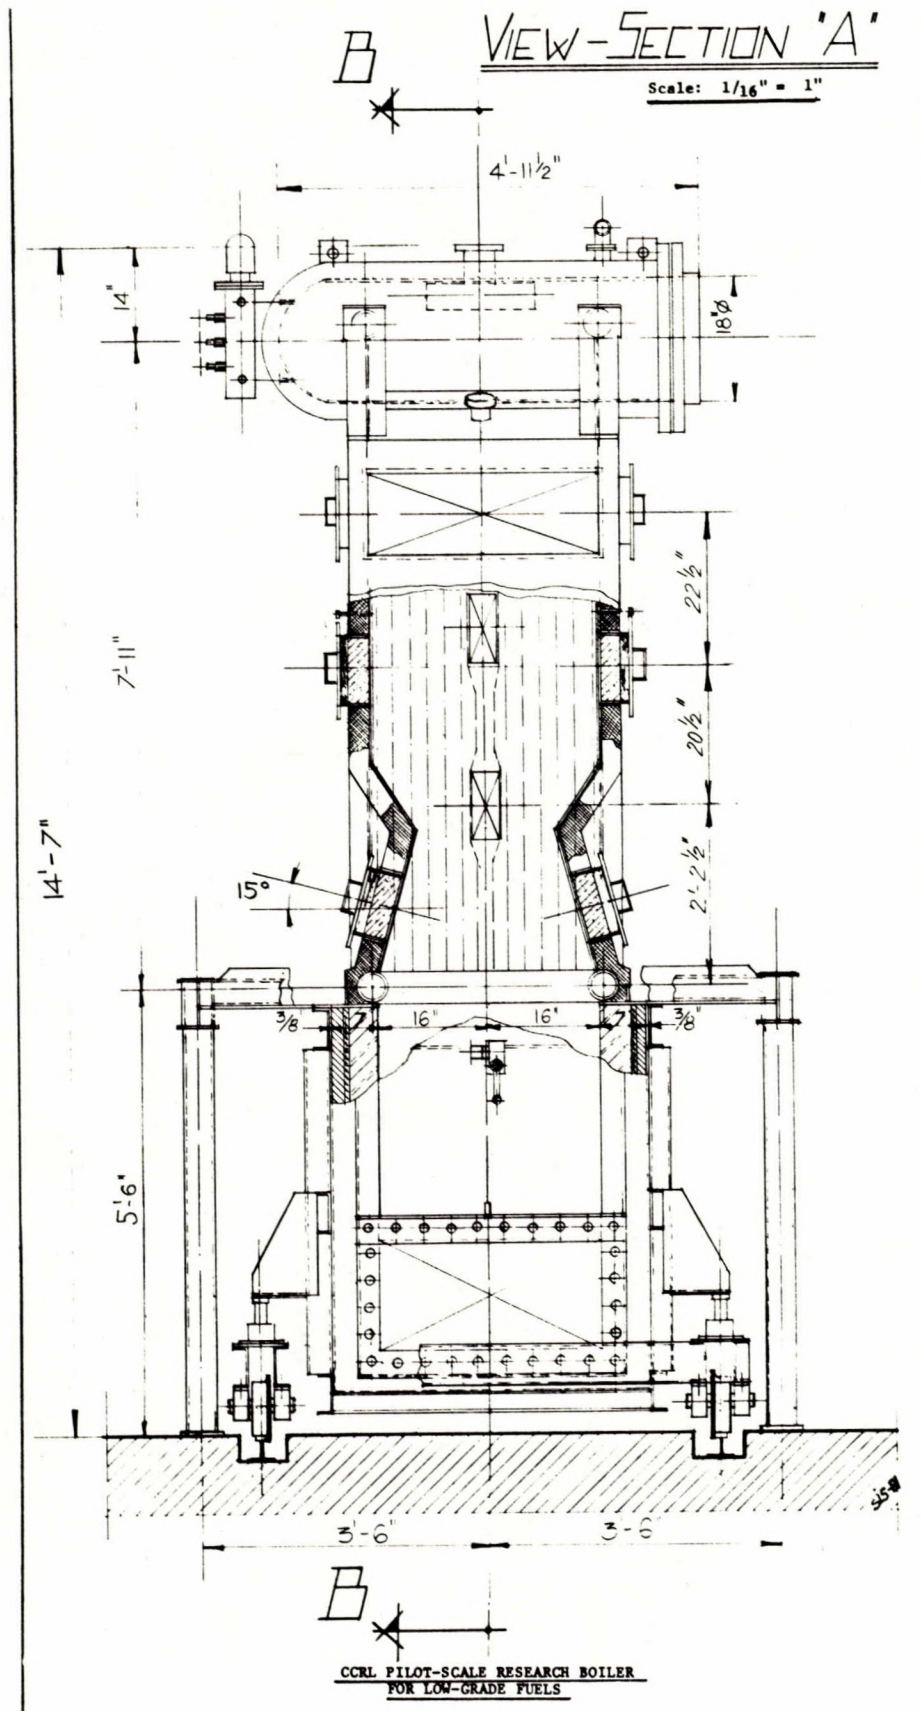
End view of boiler section of new pilot-scale combustion facility
